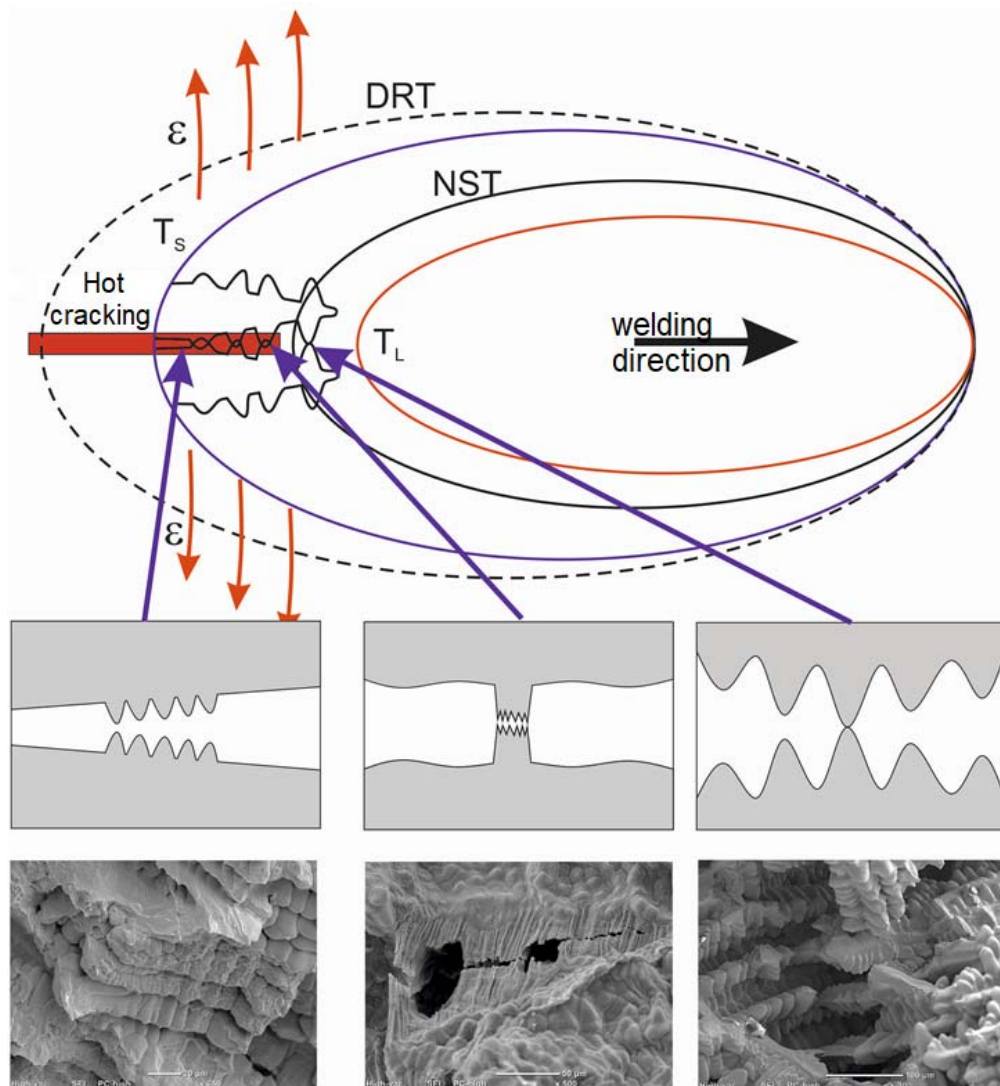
Diagram of the hot cracking mechanism in Inconel 617 in the HTBR during the welding of TIG method
